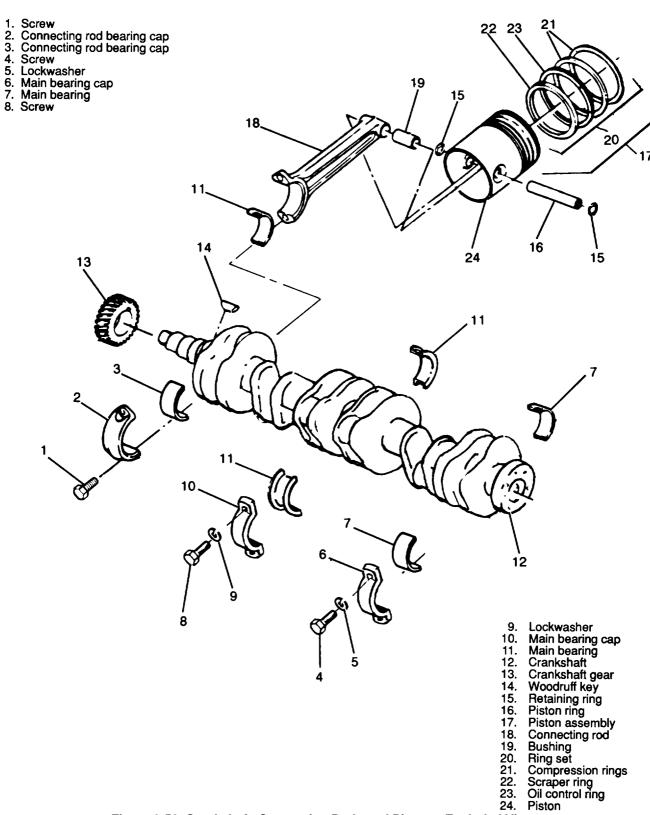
Crankshaft, Connecting Rods and Pistons, Exploded View
